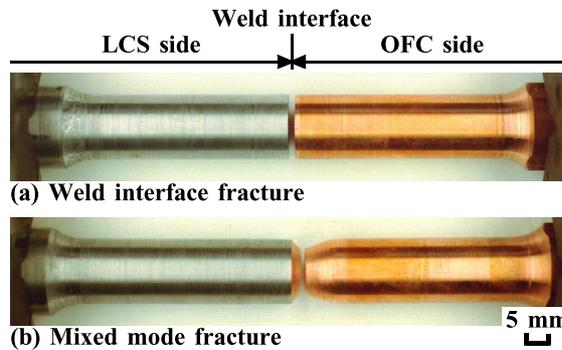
Example of joint tensile test specimens appearance after tensile testing; friction pressure of 90 MPa.
